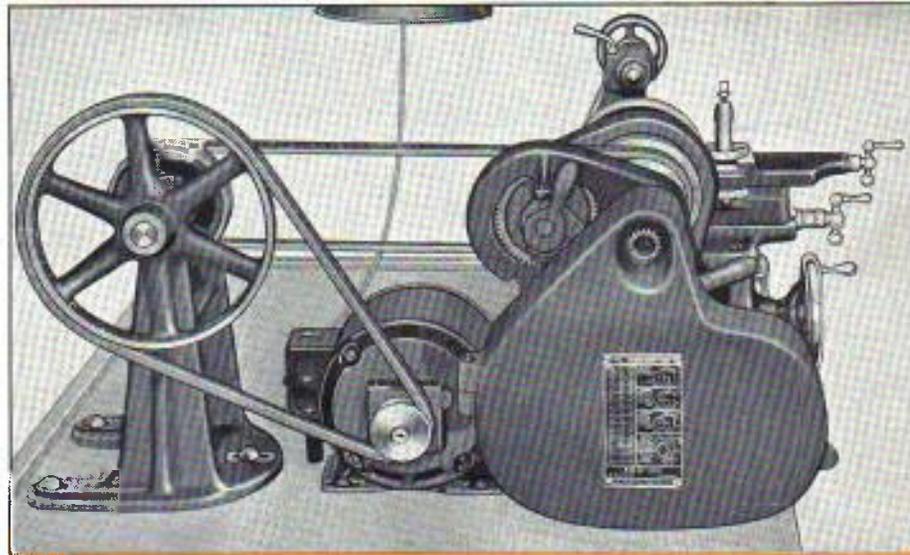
End View of 9-inch "Workshop" Precision Bench Lathe with Horizontal Motor Drive Countershaft—Plain Type.
